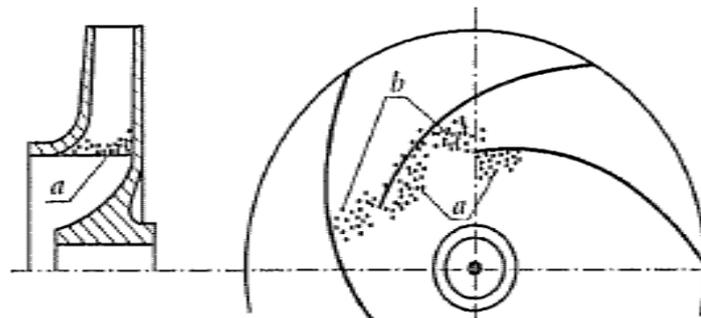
Damage due to cavitation in the impeller of a centrifugal pump [2], [6]
